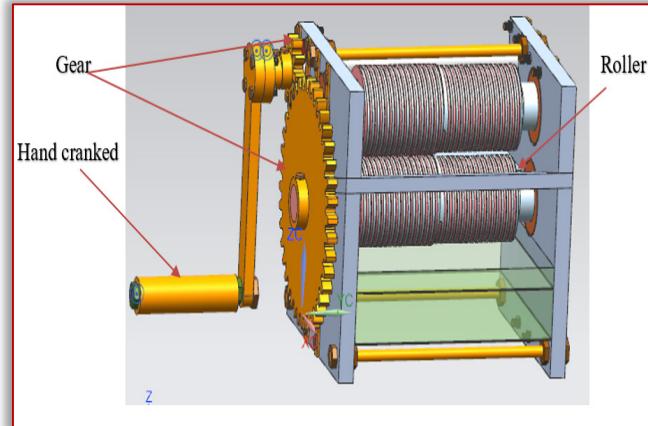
3D CAD model of the hand-cranked two-roller sugarcane press
